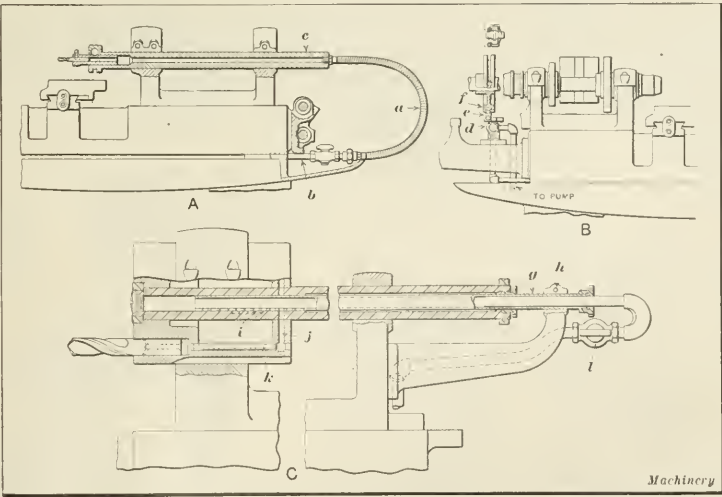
Examples from Practice of Cleveland Automatic Machine Co. in delivering Lubricant to Oil-tube Tools
